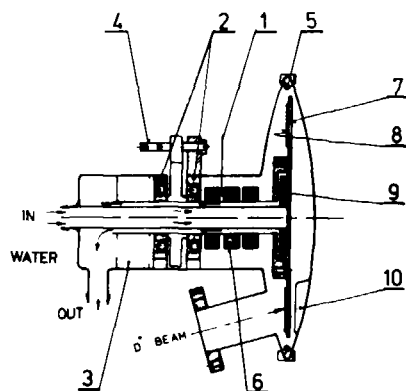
Scheme of the Debrecen rotating target assembly<sup>21)</sup>. 1-magnetic fluid seal, 2-bearings, 3-PTFE insert, 4-remote drive, 5-O-ring seal, 6-annular magnets, 7-OFHC Cu disc, 8-TiI coating, 9-radiator shaped cooling system, 10-place for samples.
